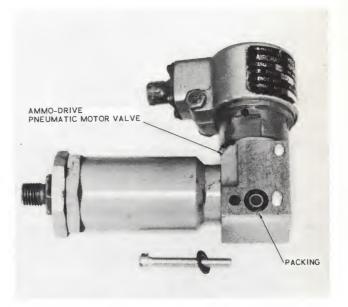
Ammo-Drive Pneumatic Motor Valve
